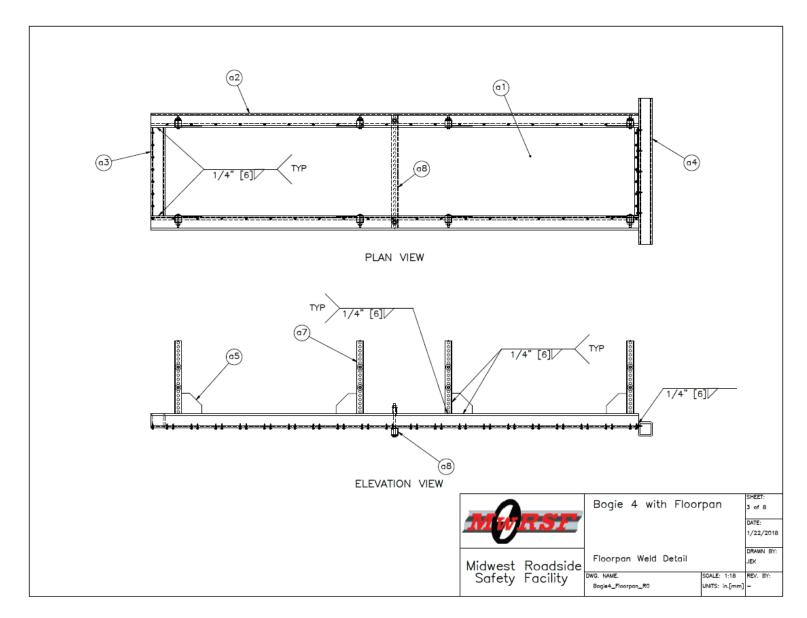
Floor Pan Weld Detail, Test Nos. MWPFP-22 through MWPFP-26
